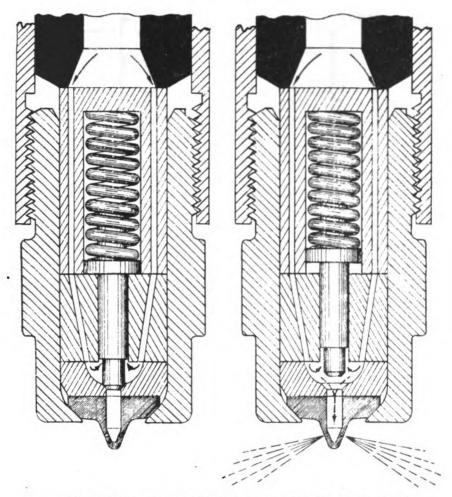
shows one type of open injection nozzle. The surge of fuel delivered by the jerk pump opens the spring loaded check valves at a predetermined pressure, passes through the spiral flutes on the director in the nozzle assembly, and emerges with a whirling motion from the nozzle orifice into the engine cylinder. The spring-loaded check valves prevent dripping of fuel from the nozzle into the engine after the desired quantity of fuel has been injected. This design is used with low injection pressures (1,000 pounds per square inch gage) in connection with a high-turbulence combustion chamber construction. Due to the combustion chamber design, the air in the chamber is given a whirling motion, and this, rather than the nozzle action, is relied upon for atomization of the fuel. The air in the cylinder whirls in the direction opposed to the spray whirl.
